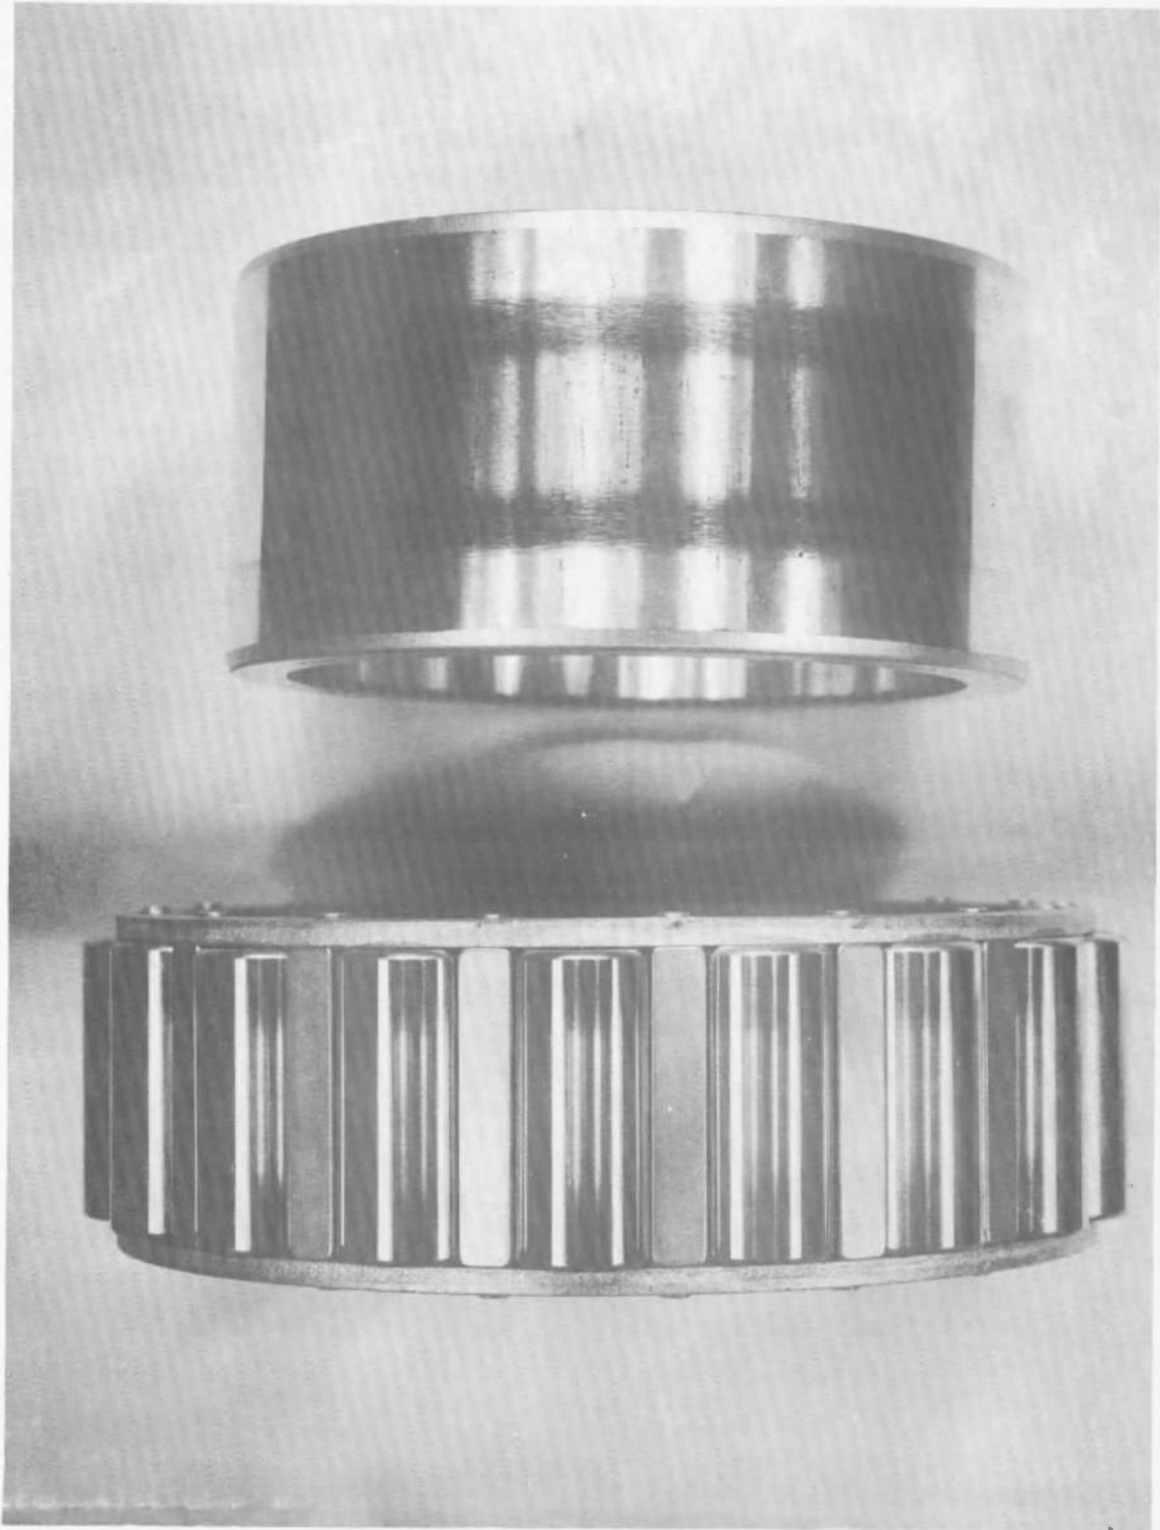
Test No. 2 (one of 4 bearings) – View of (100mm) Inner Race and Roller-cage Assembly from Cylindrical Bearing – 23 Kt Au Plated Except Rollers – Dark Bands are Polished Areas – No Coating Failure
